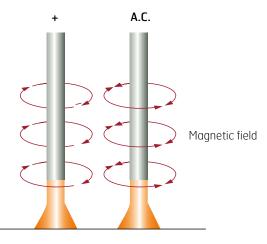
Welding performances with two electrodes using a combination of D.C. and A.C.
